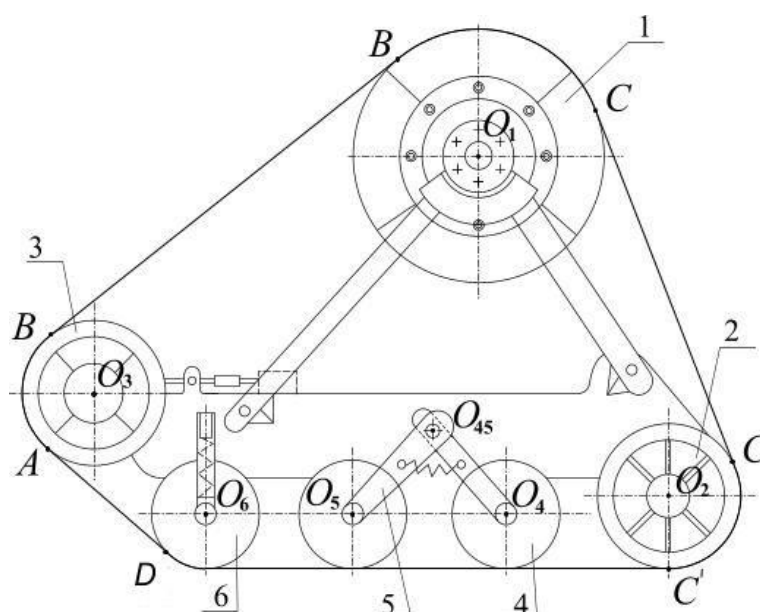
Crawler thruster of a mini tractor: 1-drive wheel, 2-sprocket wheel, 3-stroke wheel, 4, 5, 6 - clamping rollers
